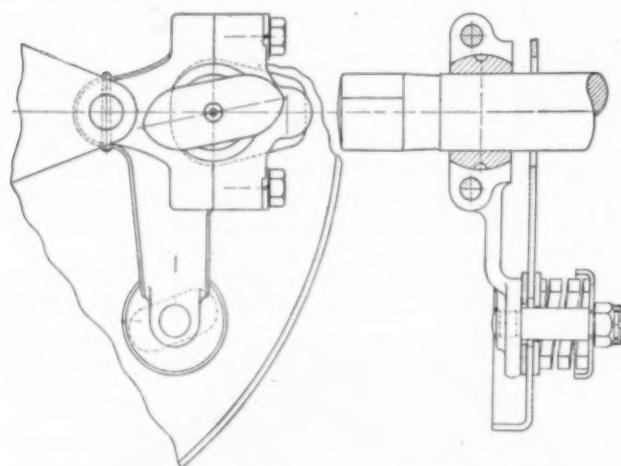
The Cam Is Mounted on a Floating Bell Crank
